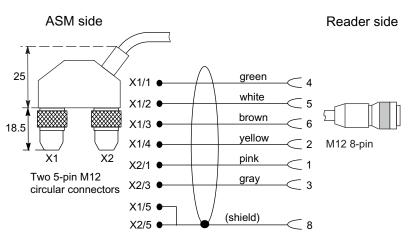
Connecting cable between ASM 452/473 and RF3xxR reader with RS422 (6GT2891-1CH20)
